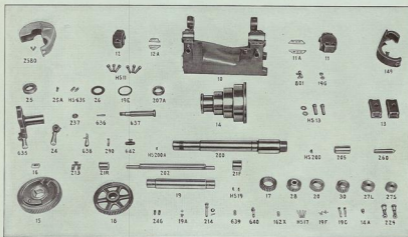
Headstock Parts for Series "5" South Bend Lathes.
